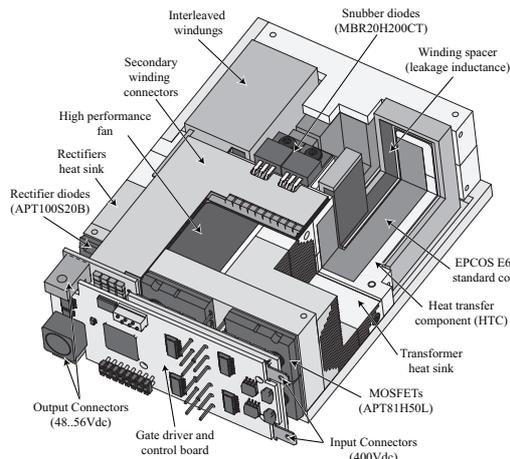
Drawing of the prototype with a cut through the transformer heat sink and winding. (The upper cover have been omitted.)
